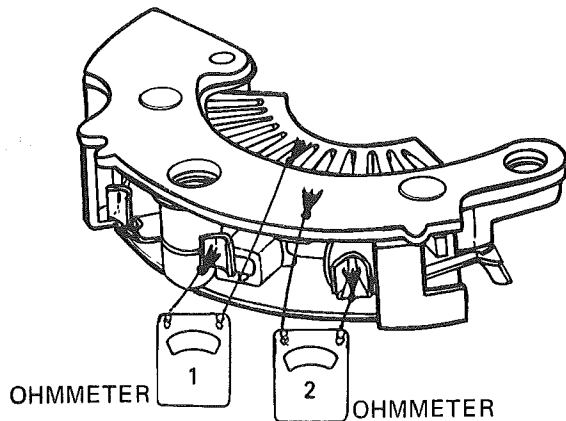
CS130 Generator Disassembly, Test and Reassembly 1 of 3
